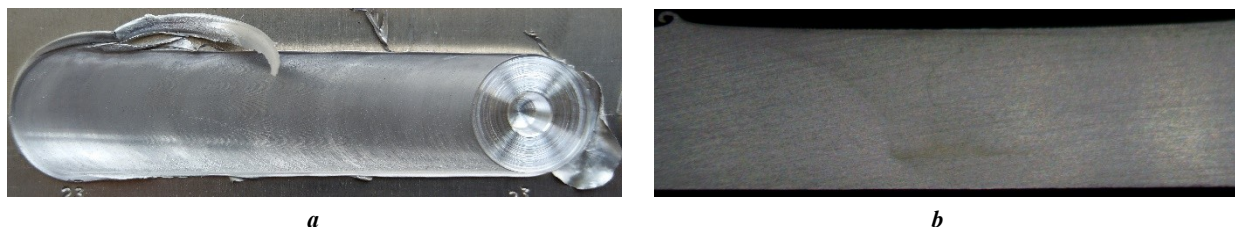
Appearance (a) and macrosection (b) of the cross section of the welded joint produced by a tool with a cylindrical pin shape (Fig. 1 a).
